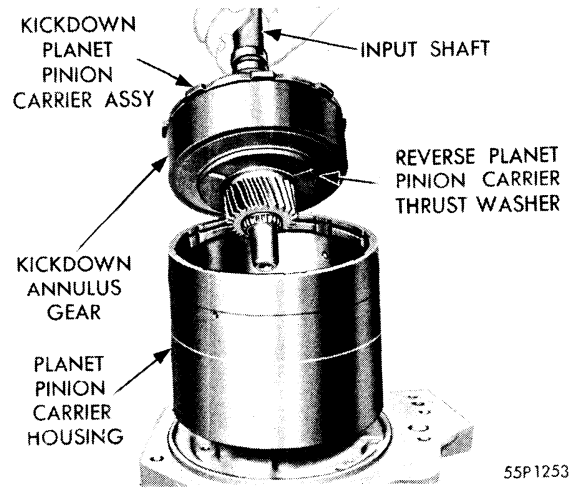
Removing or Installing Input Shaft and Carrier Assembly (Typical View)
